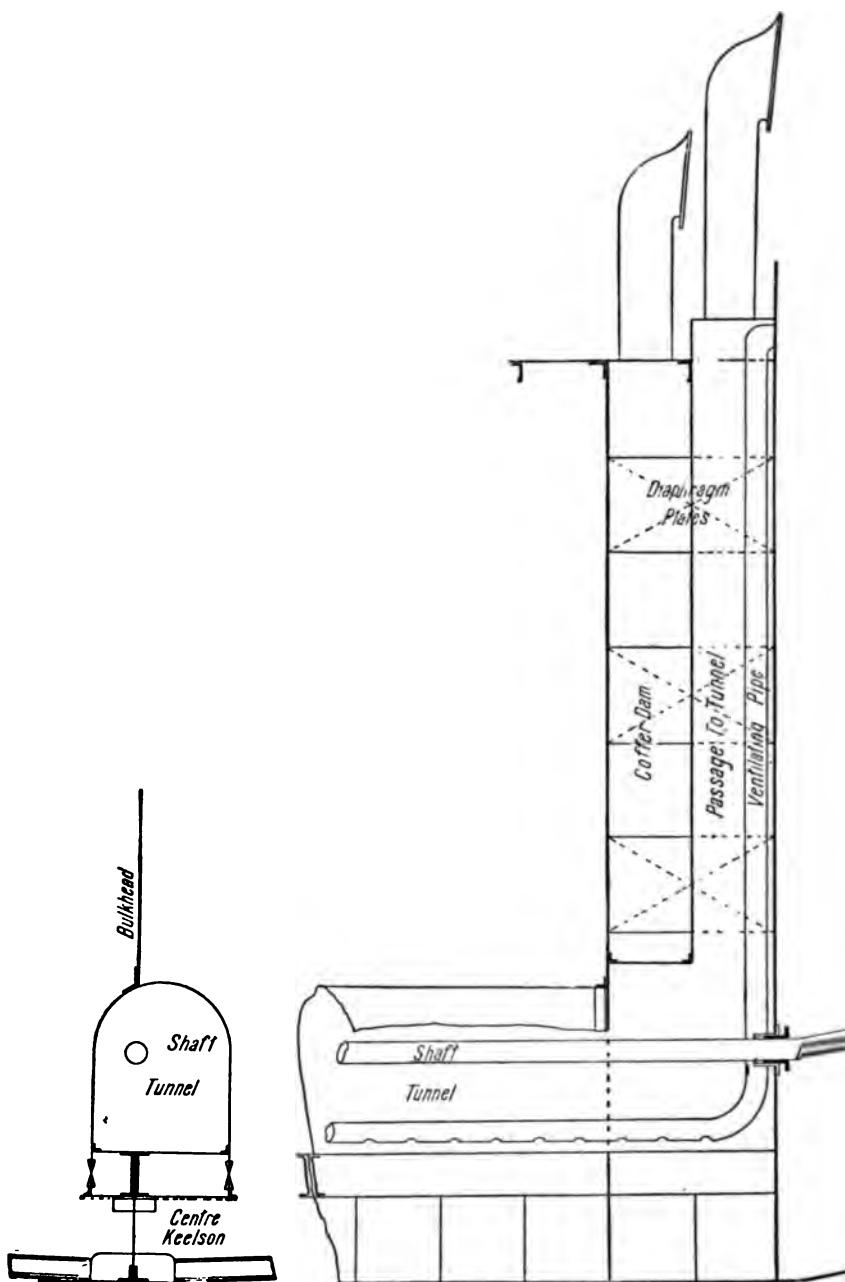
Enlarged View of Coffer-dam, showing Diaphragm Plates, Trunk-way to Tunnel, and Ventilating Pipe.
